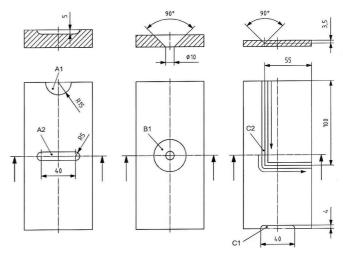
Dimensions of samples used for padding and welding, simulating the typical casting defects, according to PN EN 15614-4
